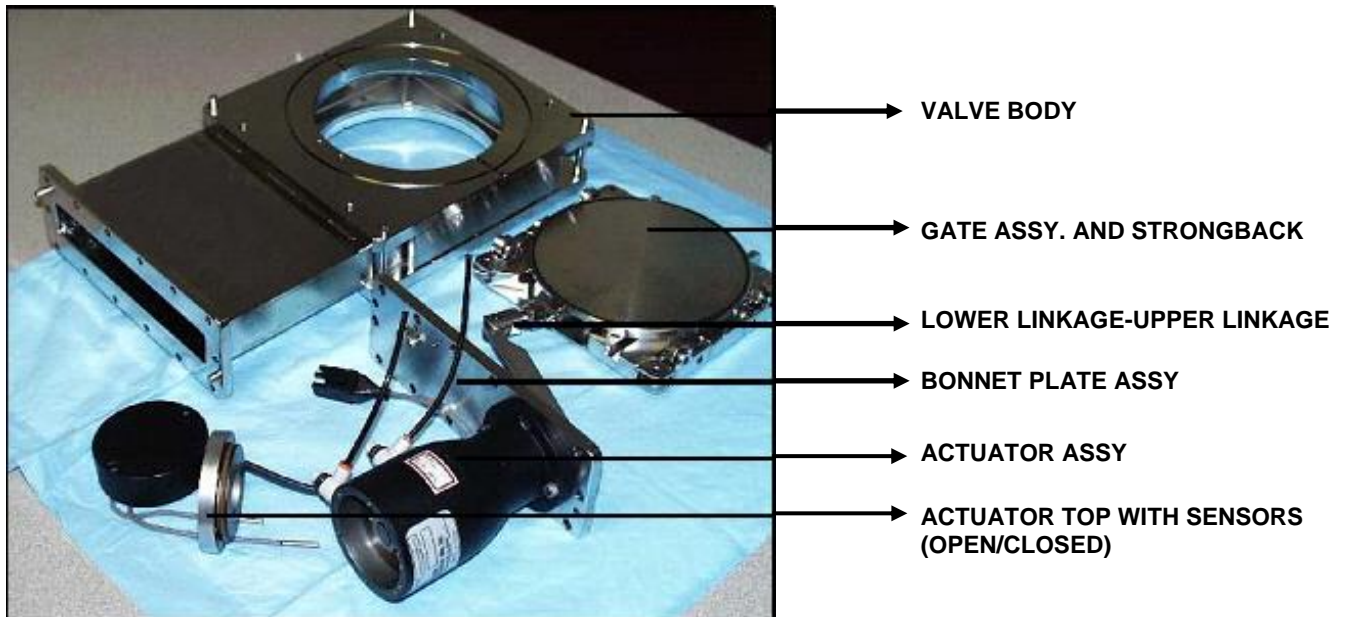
BONNET ACTUATOR CARRIGE ASSY. SEPARATED FROM VALVE BODY
